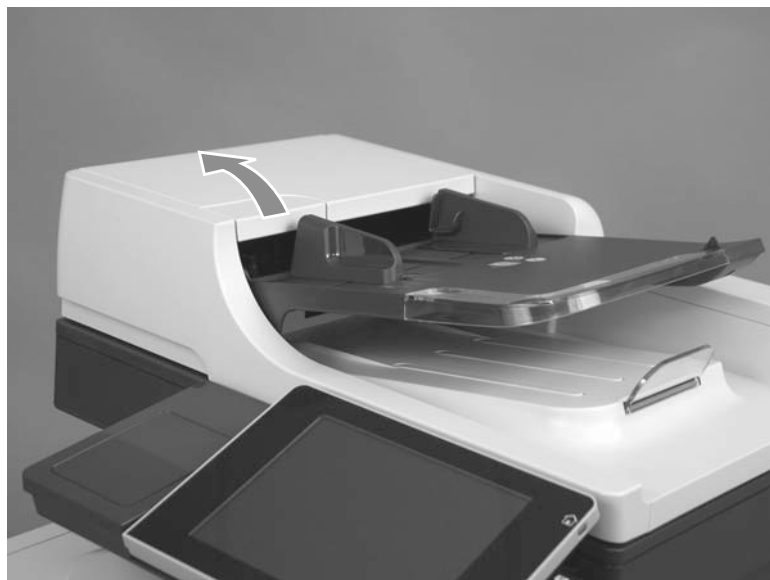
Remove the document feeder rear cover (4 of 4)
